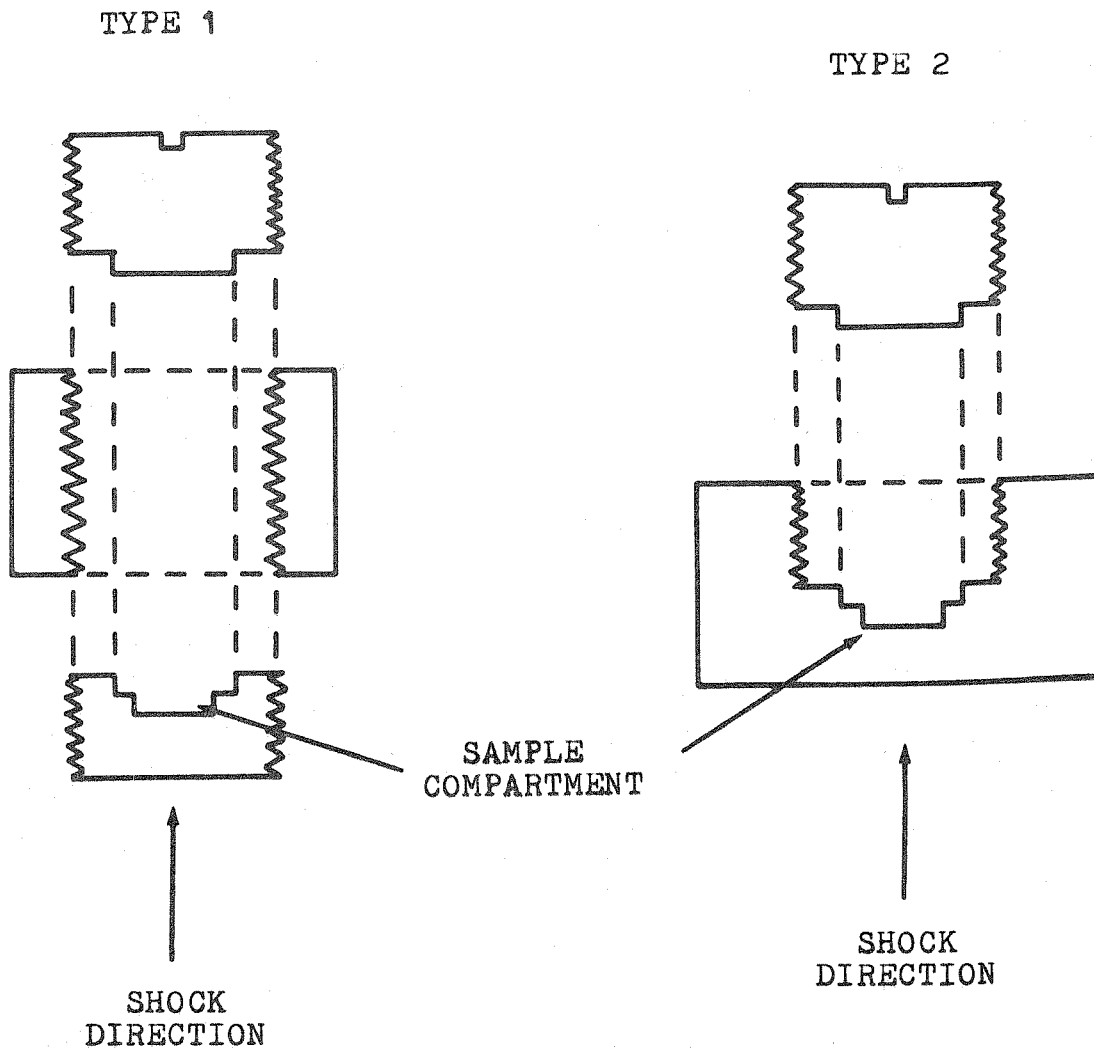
A. Two sample container designs. Type 1: a  $3/4$ -inch (19 mm) diameter,  $1/2$ -inch (12.7 mm) long cylinder with a two-piece screw-in plug. Type 2: a 1-inch (25.4 mm) diameter,  $1/2$ -inch (12.7 mm) long cylinder with a one-piece screw-in plug.
